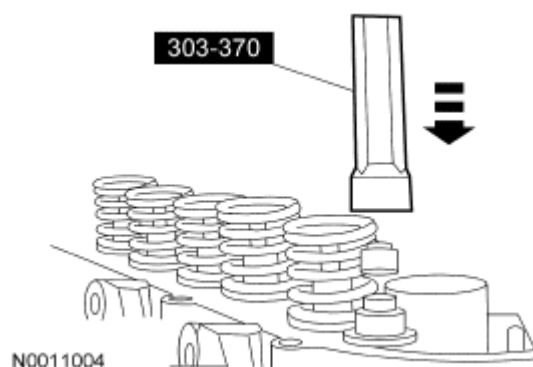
Using Special Tool To Install New Valve Stem Seals
